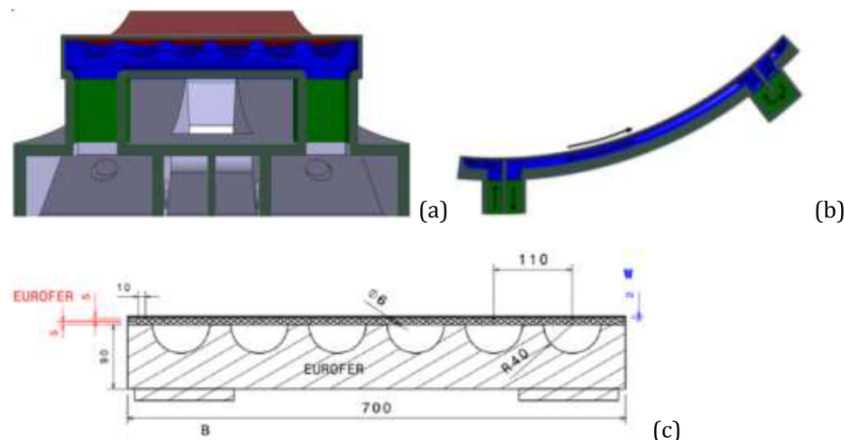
CAD model images of the SLC illustrating the poloidal (a) and toroidal (b) cross sections and schematic drawing of the poloidal section showing the dimensions (c).
